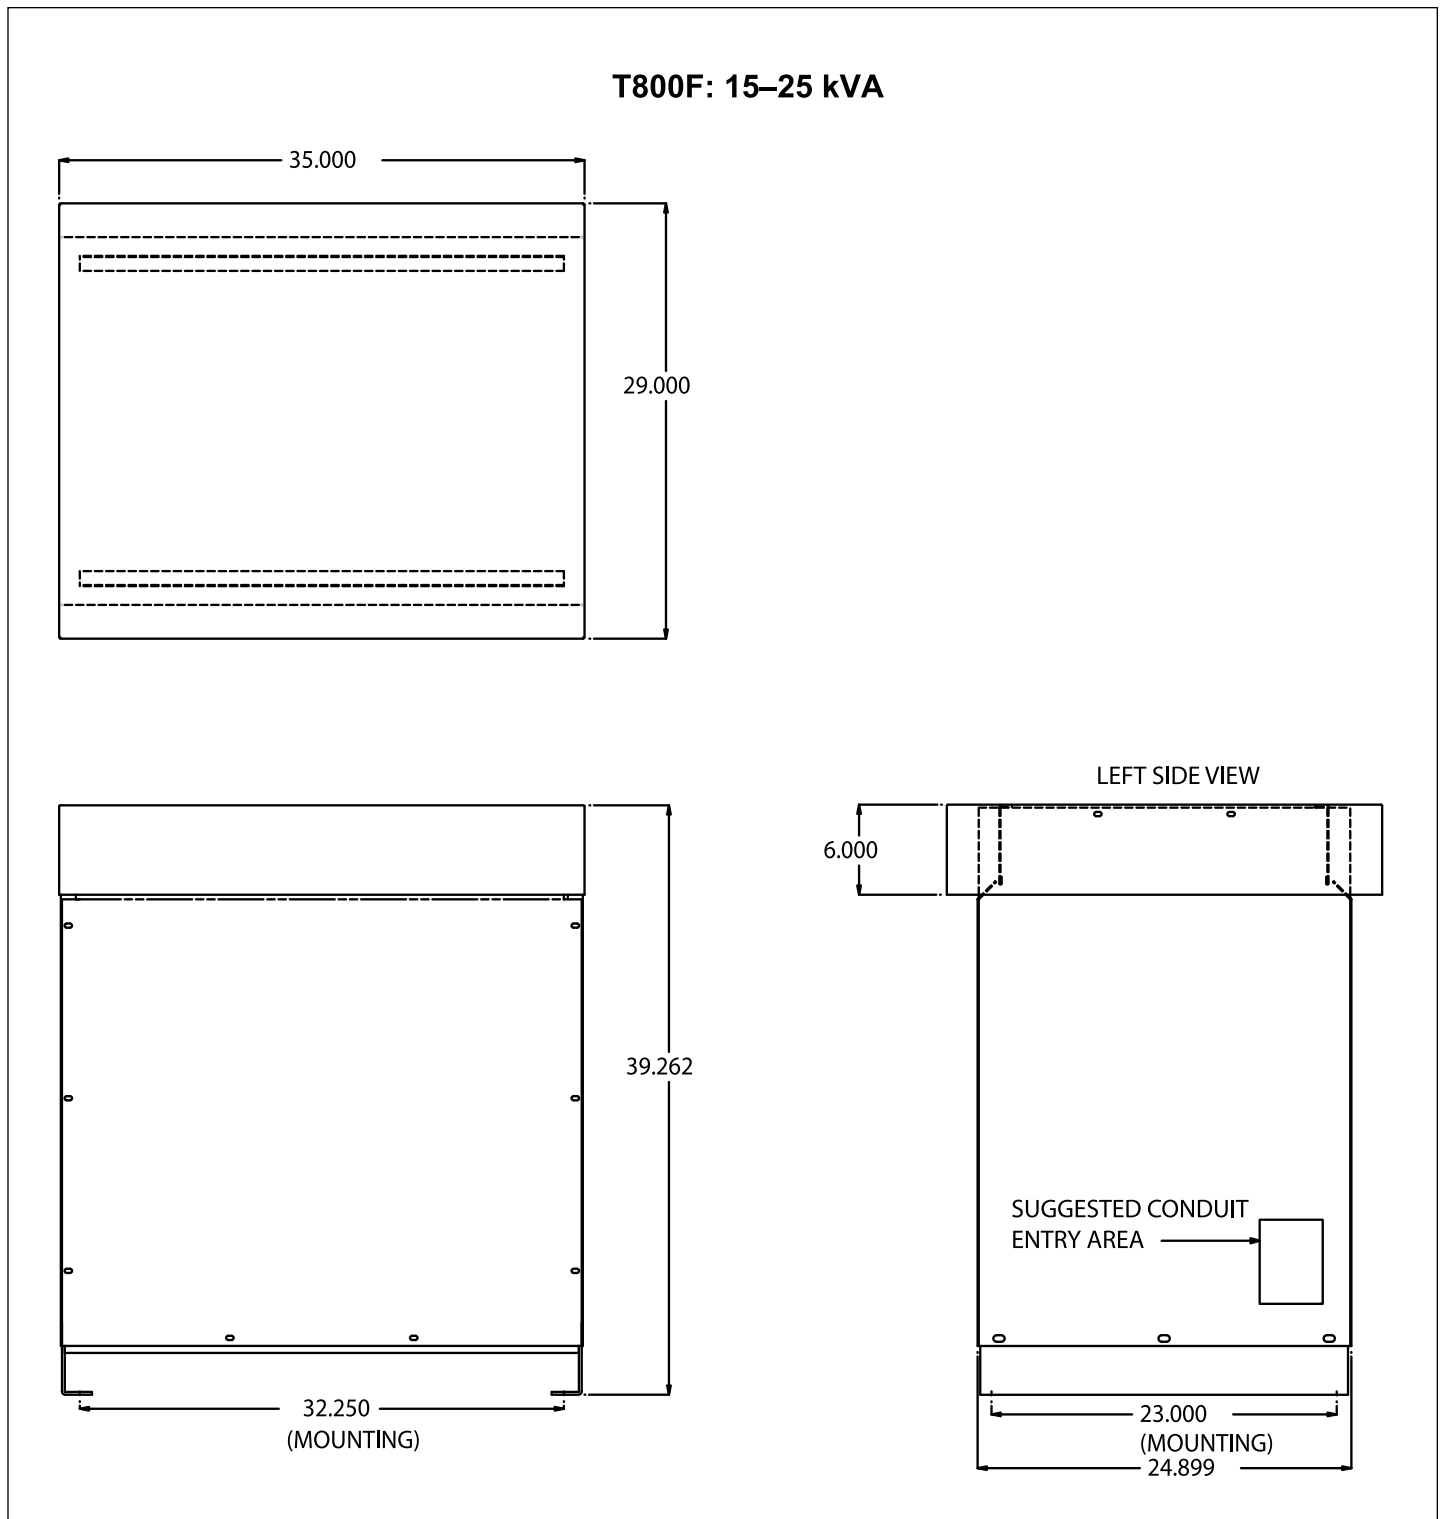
Cabinet dimensions T800F floor-mounted unit, 15,000–25,000 VA
